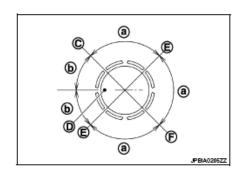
Identifying Stamped Mark On Ring Courtesy of NISSAN MOTOR CO., U.S.A.
